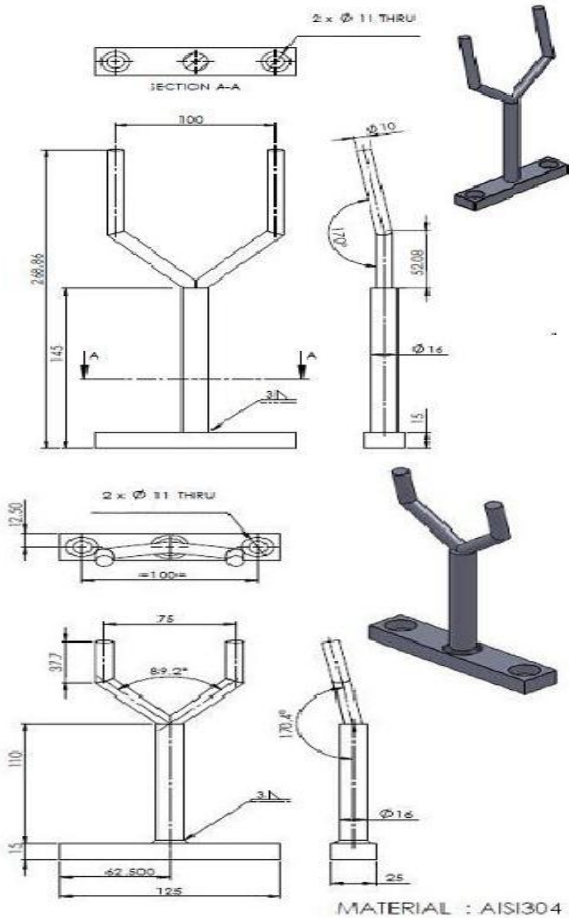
Fixture elements for holding Rear Axle Shaft
